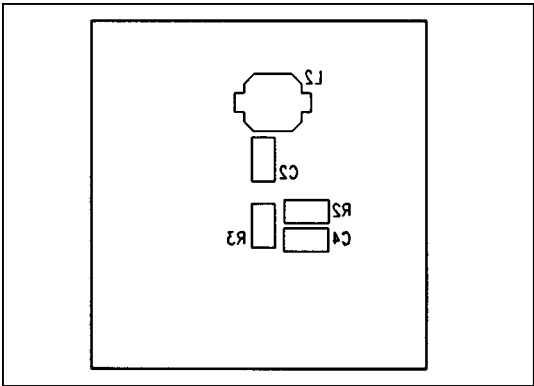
MAX877 EV Kit Component Placement Guide (Solder Side)
